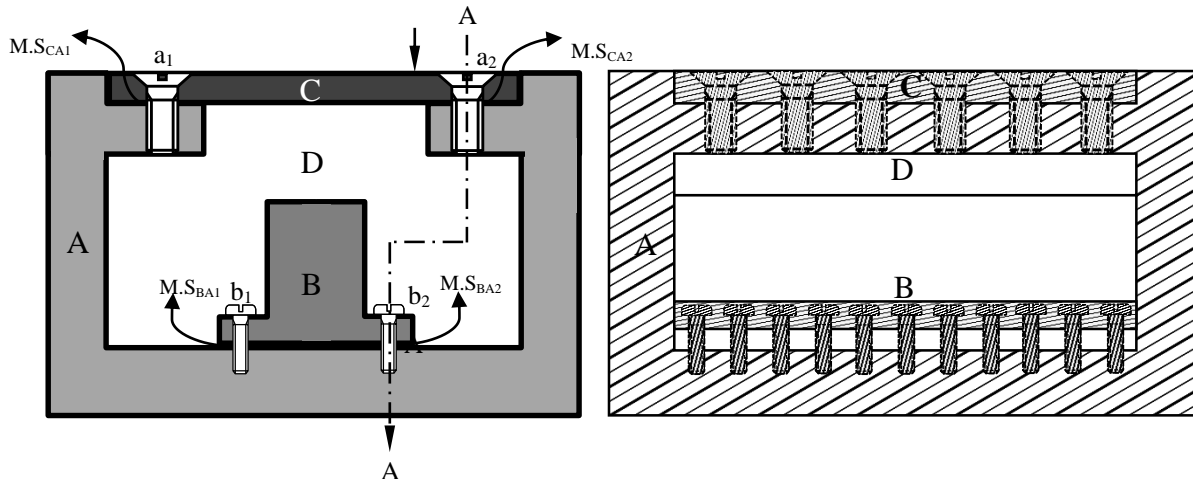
Learn-by-progress disassembly technic applied on a metallic chamber. a) front-view; b) side-view cross-section
